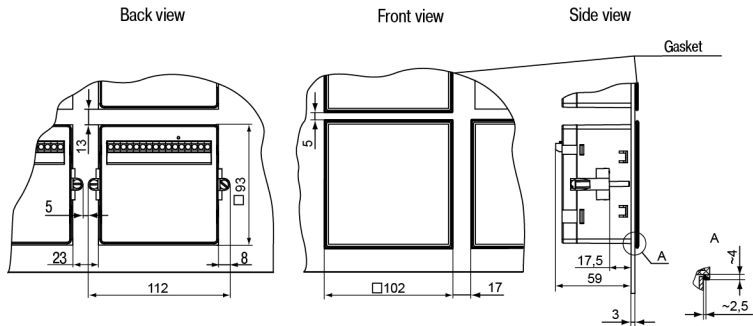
Device in Щ1 housing mounted in the control panel with 3 mm thickness
